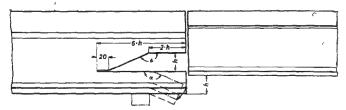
Welding preparations on a transition joint by adjusting the bigger rail profile to the smaller one.
